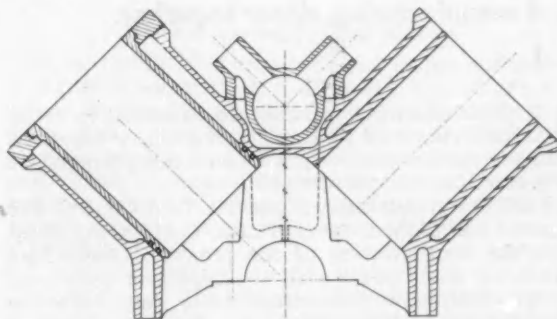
All-aluminum V-8 engine without gray-iron liner. Right side: liner is integral part with blocks. Left side: extruded aluminum sleeve is cast-in as insert.
